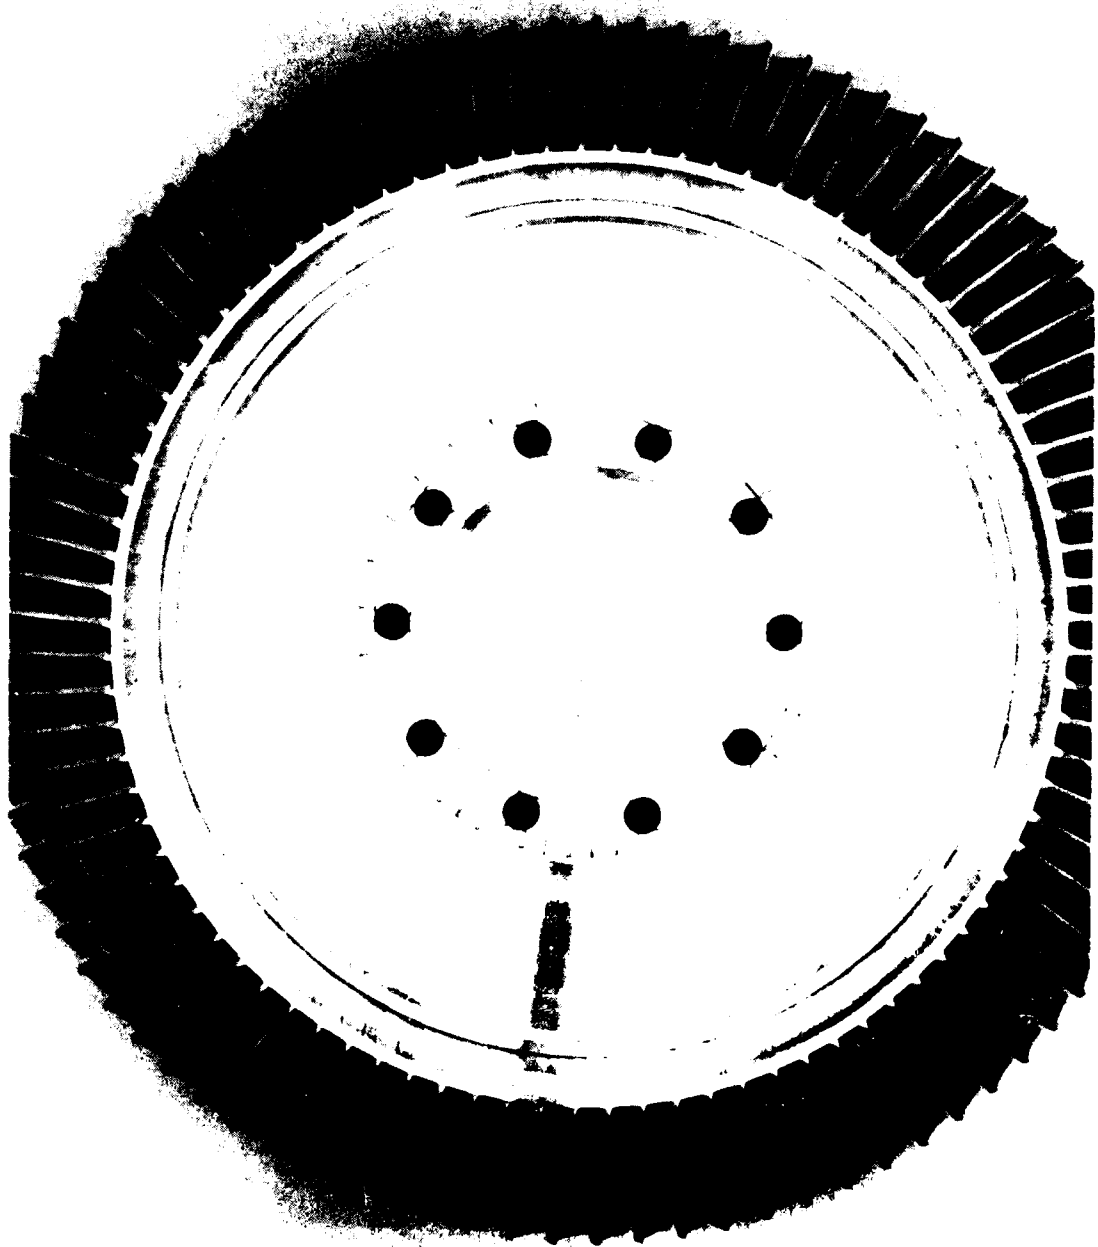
E1 Second Stage Unshrouded Wheel - Test Series #4
